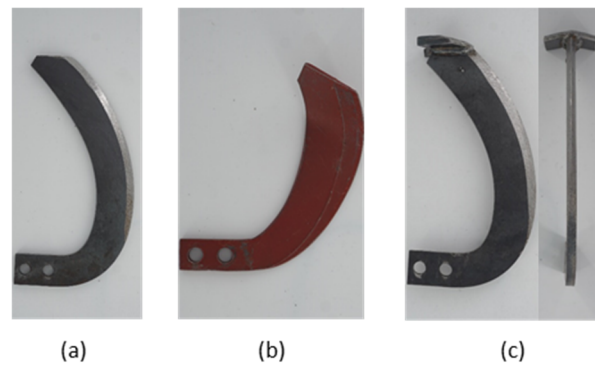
Stubble-breaking blade: (a) straight blade; (b) bent blade; (c) wing-shaped blade.
